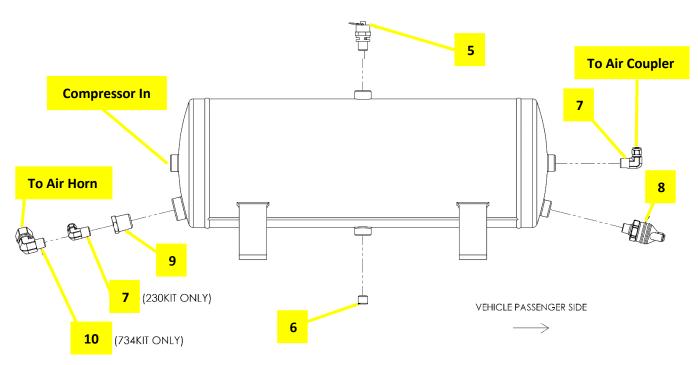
Tank Air Fittings Exploded (Top View from above Vehicle)
